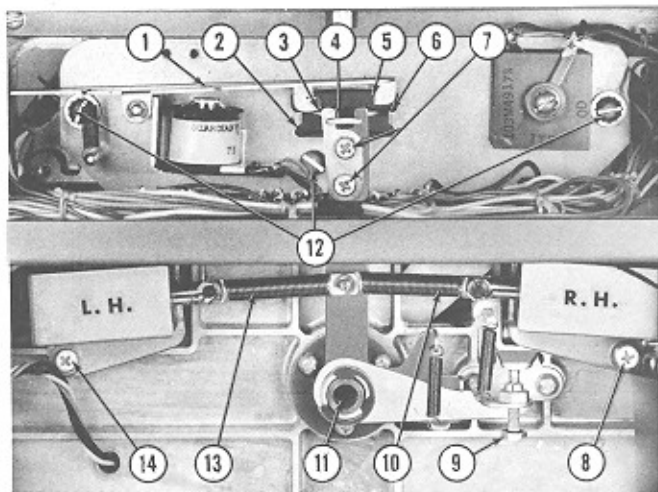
ROTATING PLATE & ROCKER ARM ADJUSTMENT
